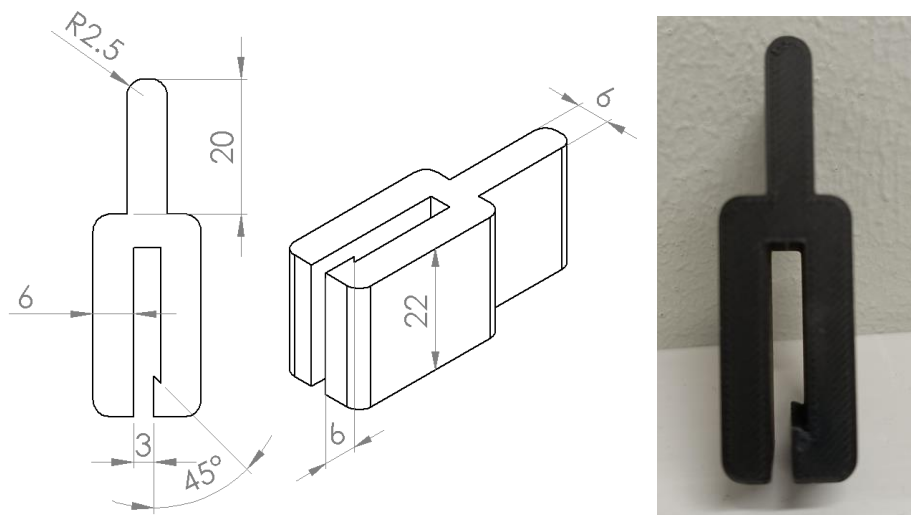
CAD design of shear test fixture and actual 3D printed fixture with XT-CF filament
